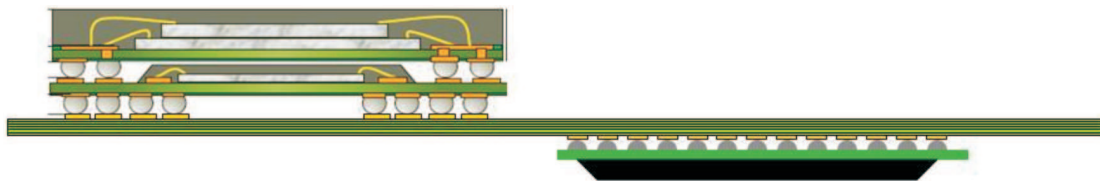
Multiple BGA Packages on PCB Should Be Off-Set
